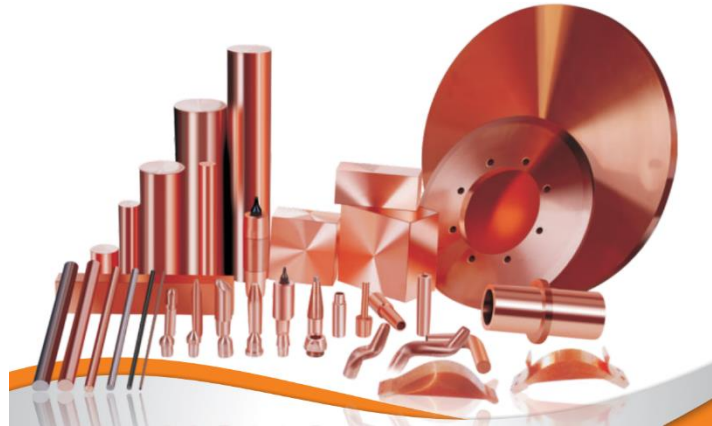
Projection welding electrode tips and typical materials (METALS).
